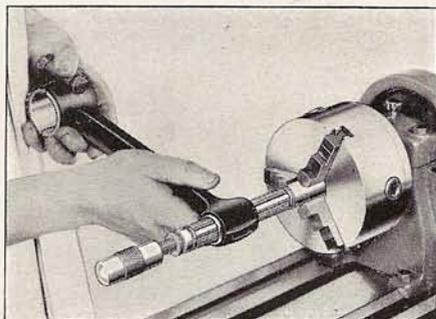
Honing Piston Pin Bearing in a Connecting Rod.
